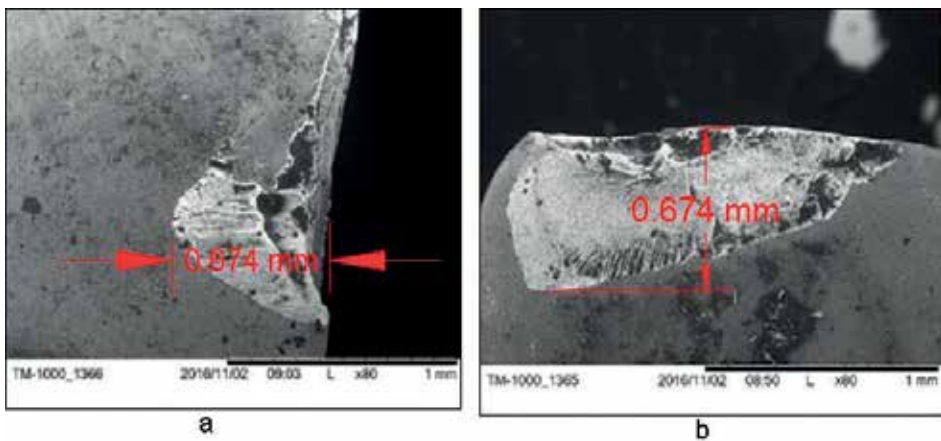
Tool wear under pure MQL cutting fluid with soybean oil (cutting time at 45 minutes): (a) rake face wear; (b) flank face wear [19].
